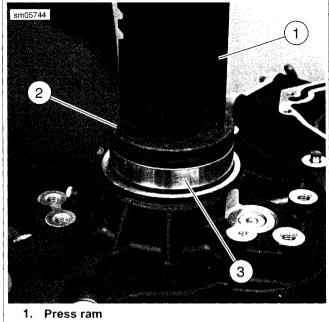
Installing Main Drive Gear Bearing: XL Models
